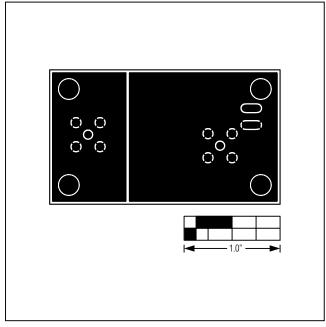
MAX9622 EV Kit PCB Layout—Solder Side
